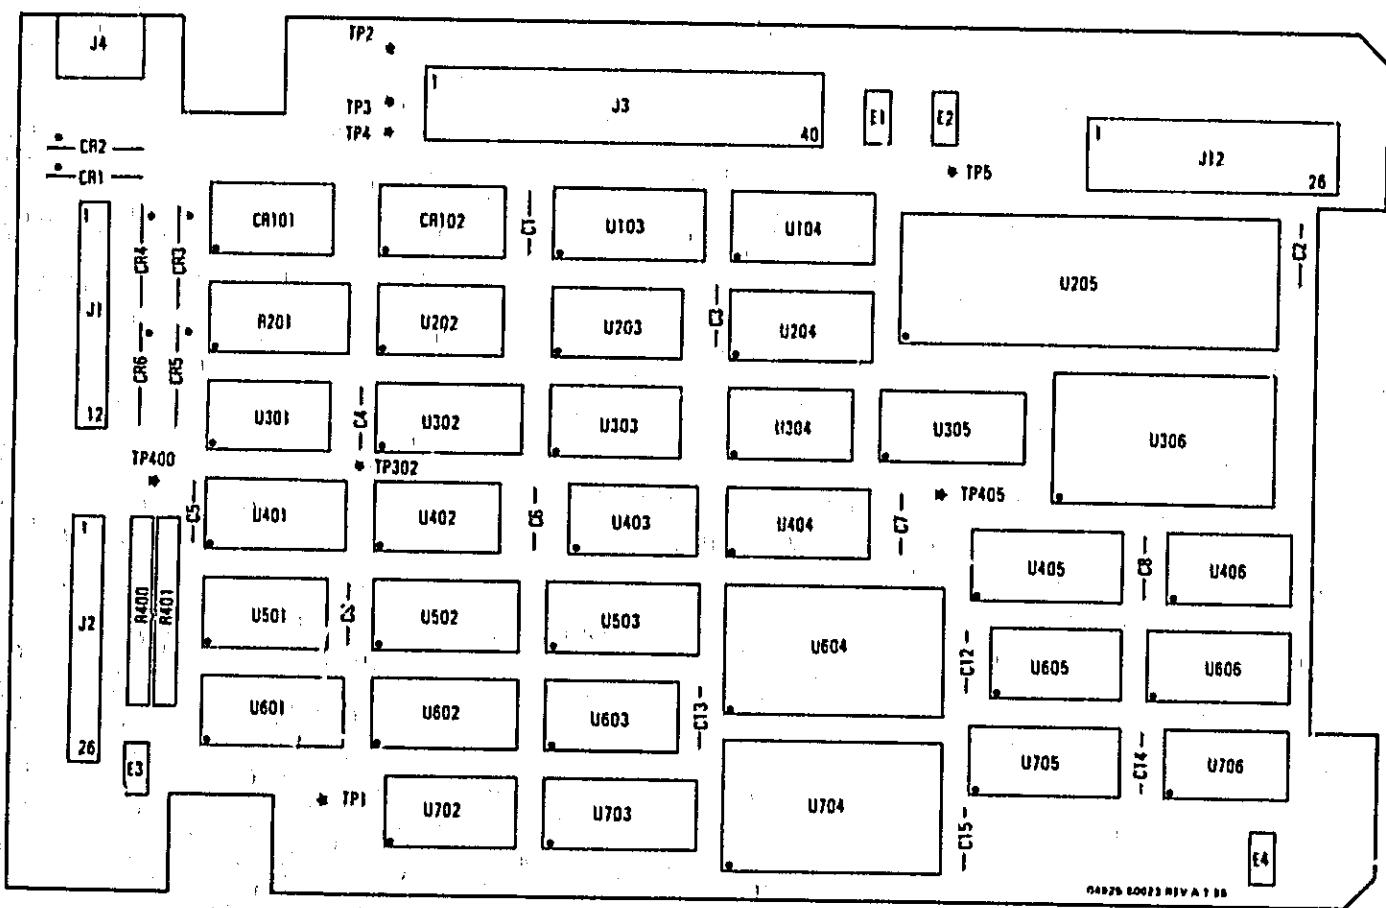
A3 Transmitter/Receiver Board Component Locator
